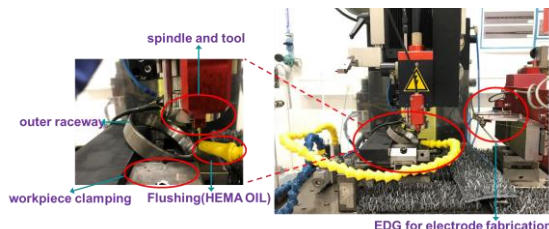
Micro-EDM milling set-up for artificial defects machining.
